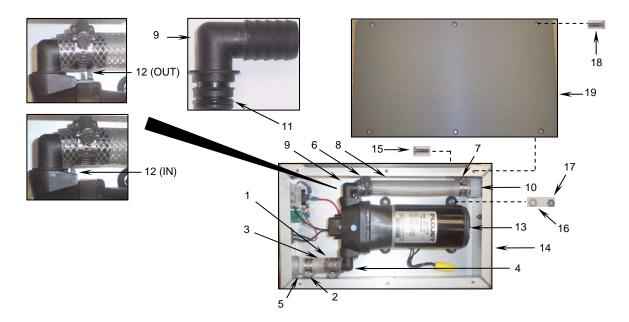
Installing the Sink Fill Pump Assembly Internal Tubing.
